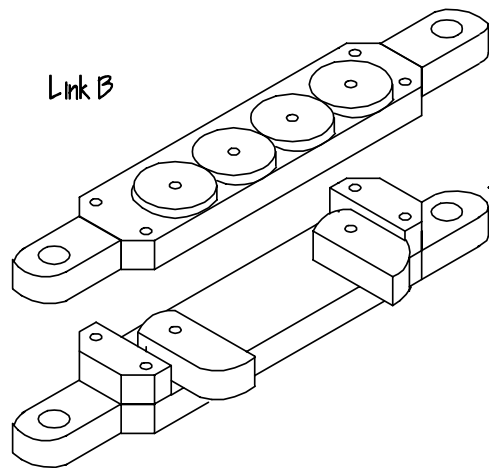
Semi-exploded view of link B showing the double cam mechanism. Shown here without the actuator
